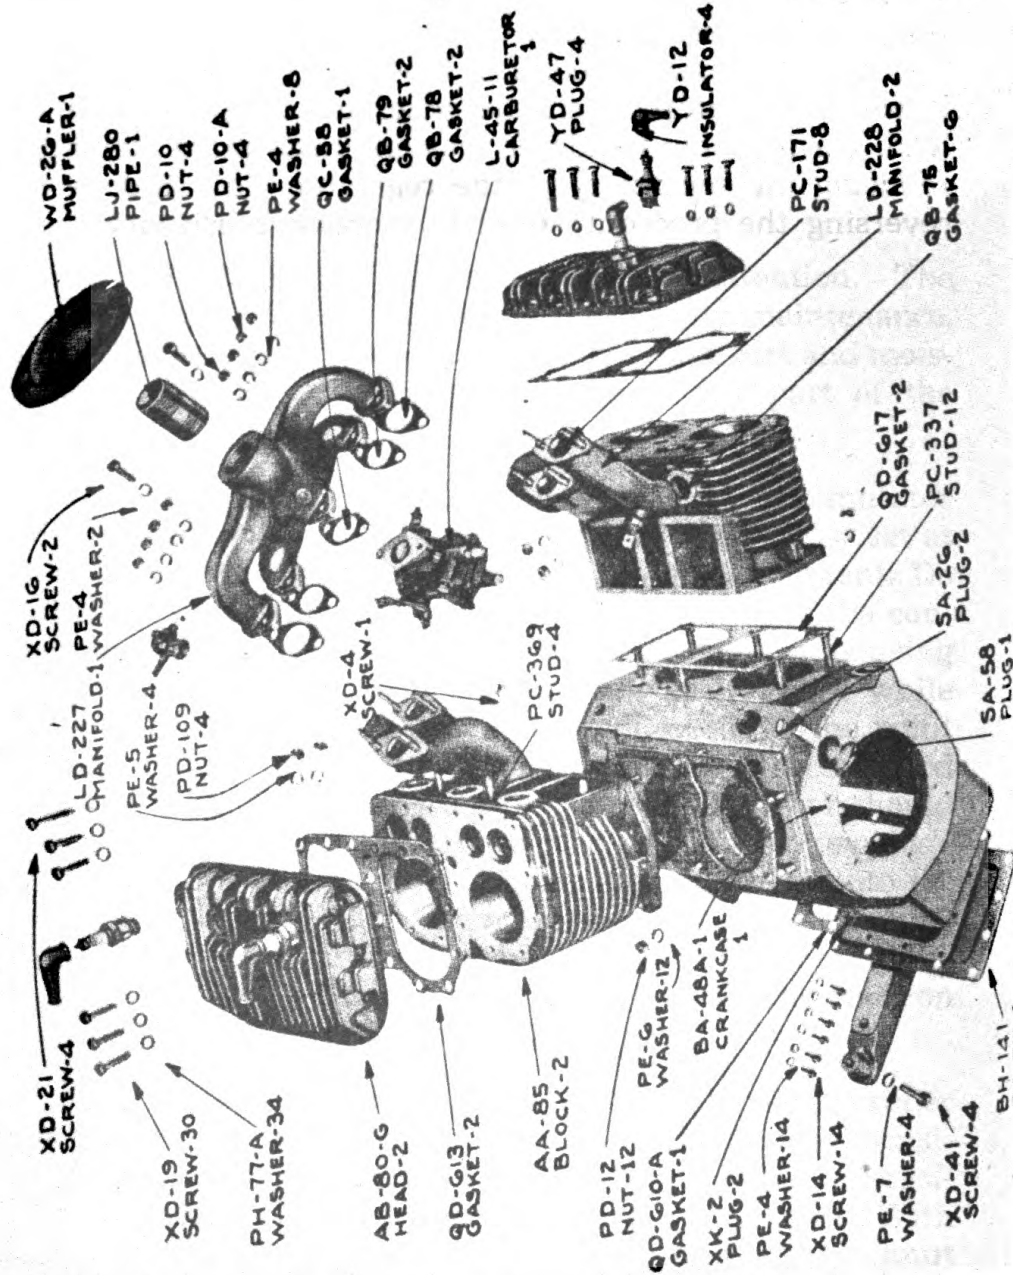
EXPLODED VIEW OF ENGINE FOR POWER UNIT PE-99-E
